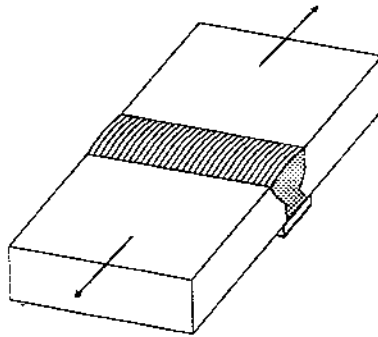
UKDEn Transverse Butt Weld 4
